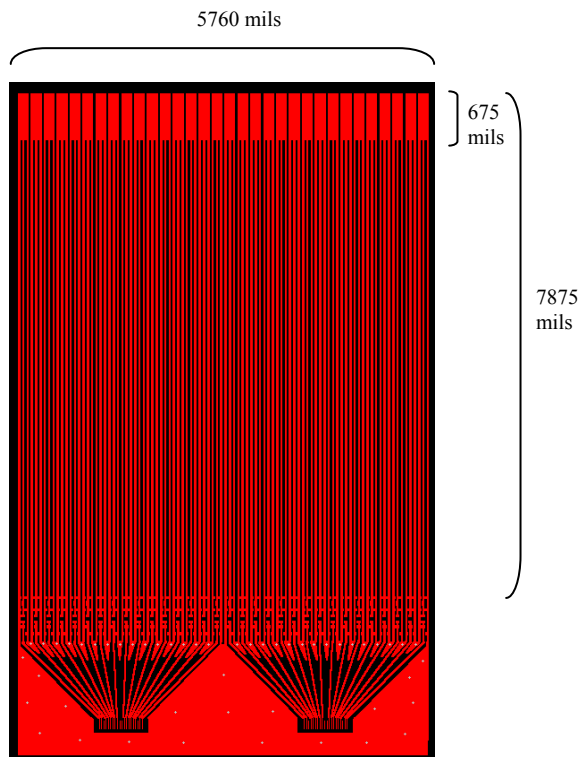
Board layout of one 32-channel section of array for 1.5T.
